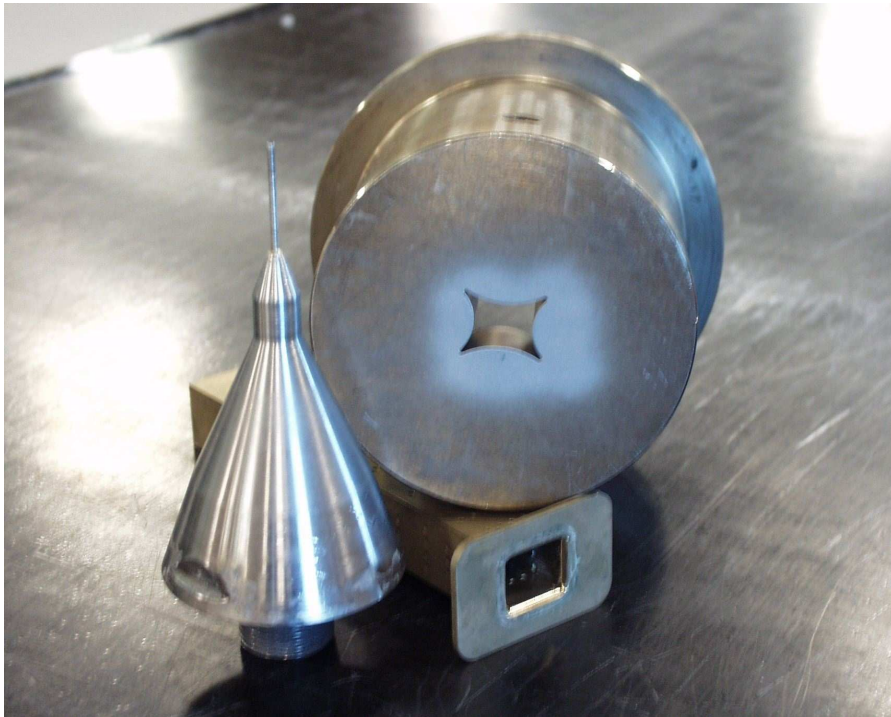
Die to produce MINER ν A's rectangular strips for OD scintillator.
